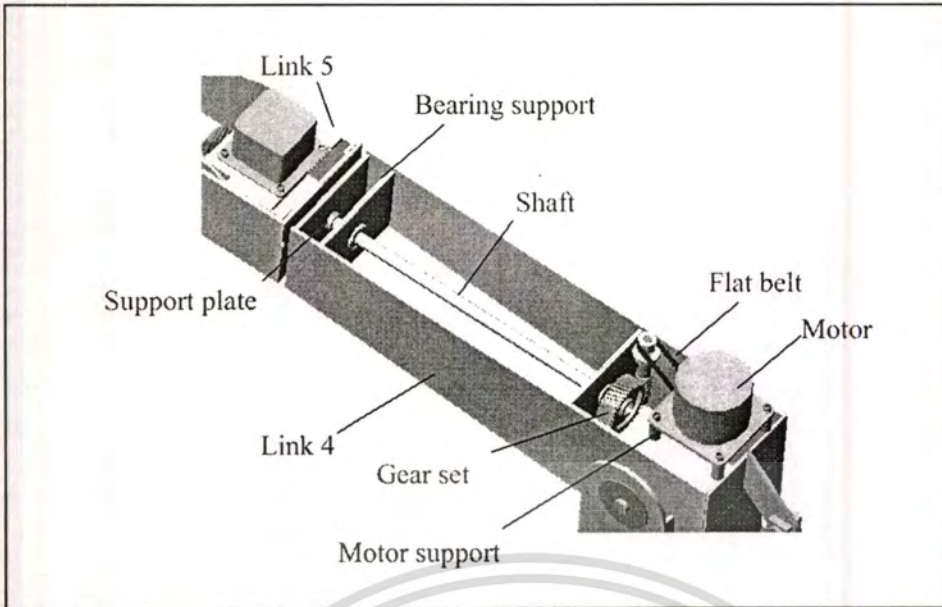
Assembly parts of power transmission on yaw (joint 4)
